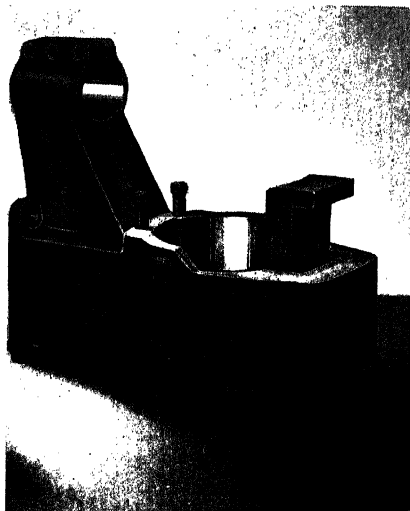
Electrode holder for steel furnaces. (Courtesy American Bridge Co., Pittsburgh, Pa.)
